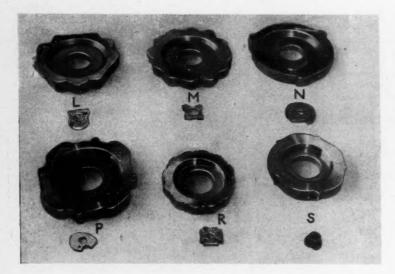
A Group of Workpieces with Profiles that have been Generated on a Fellows No. 7 High-speed Gear Shaper. The Specially-developed Cutter Employed is Seen above Each Component. Most of the Workpieces are of Steel, but the Two Cams at the Right are Machined from Tufnol
